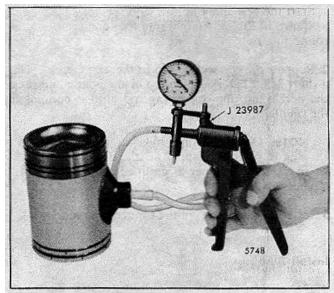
Checking Piston Pin Retainer for Proper Sealing
